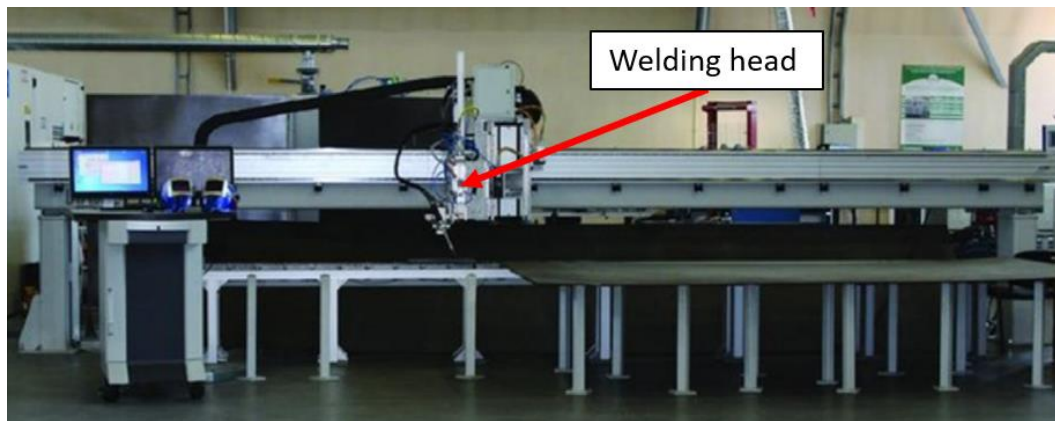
Laser welding set-up. (Voropaev et al. 2020, p. 2).
